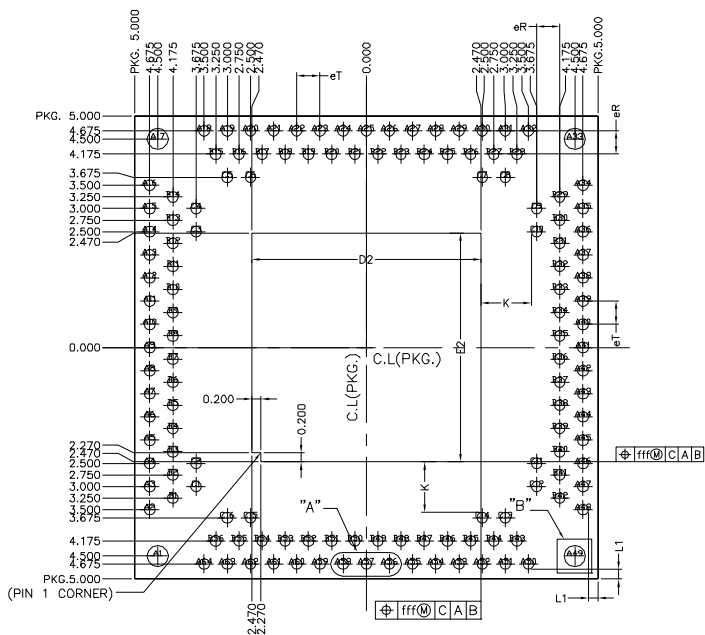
Mechanical Dimensions (10 x 10 mm² Dual-Row QFN Package)
